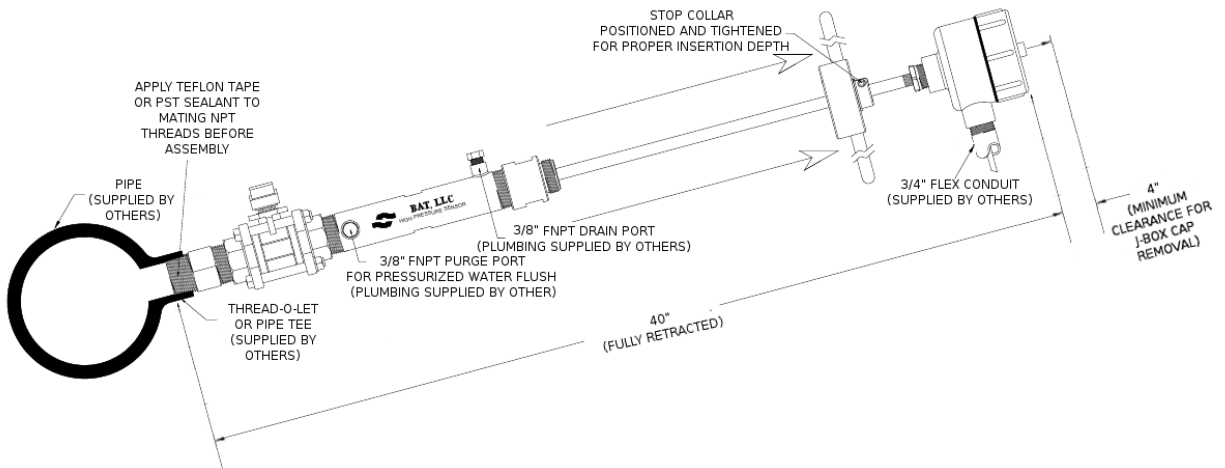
Hot Tap Assembly (Fully Retracted Sensor, Valve Closed)
